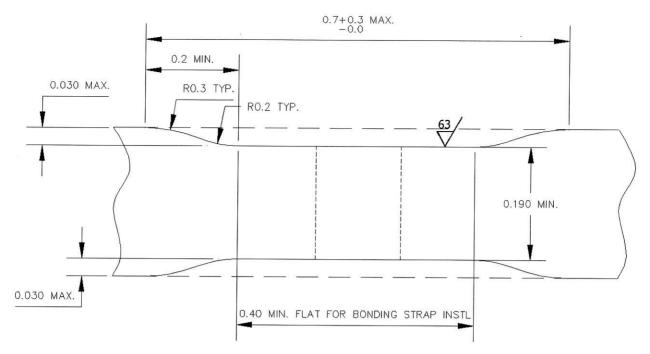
Detail A: Rework at Bonding Strap Fastener Hole
